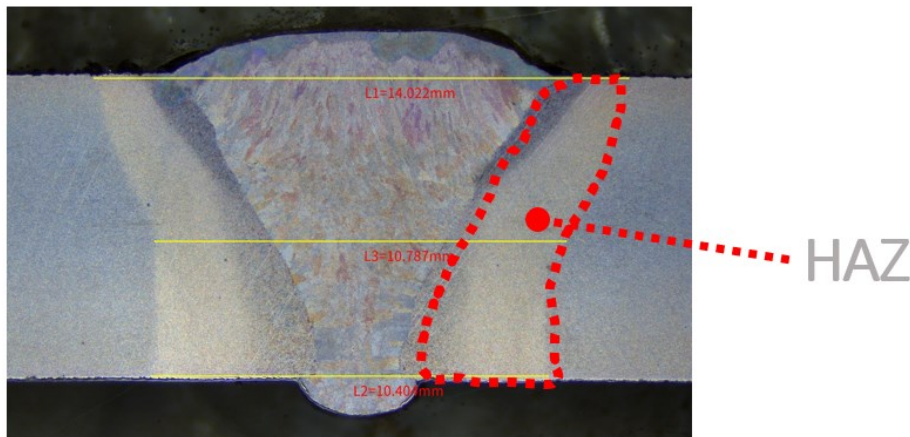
Schematic figure of V-shaped butt weld and location of HAZ.
